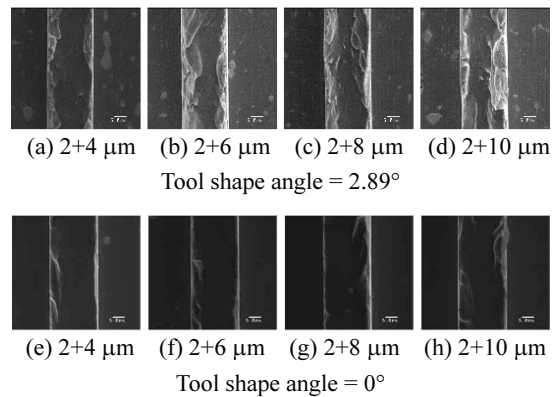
Comparison of machining surface with tool shape angle and overlapped cutting depths
